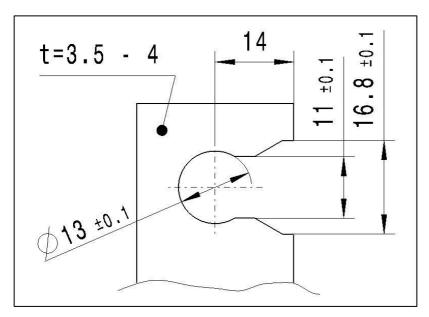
Dimensions of the parking brake cable holder
